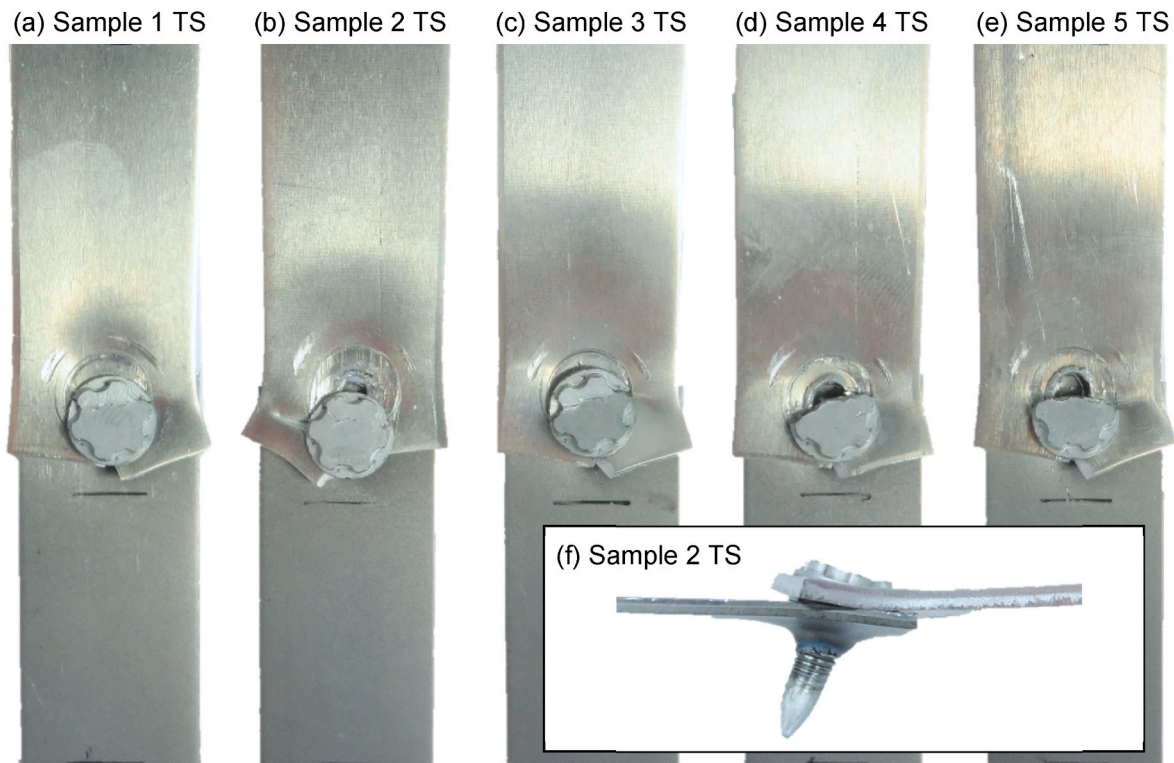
Fracture pattern after mechanical testing according to DIN EN ISO 14273. Samples generated with the target system. (a)–(e) Combination of tear out failure clamped part and failure of the screw. (f) Side view Sample 2 TS.
